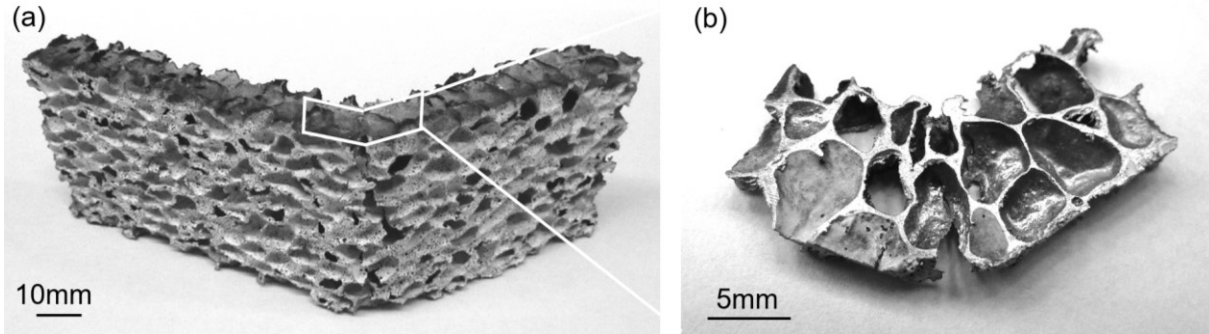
(a) Foam specimen at a bending angle of 45°, after being laser formed at 180 W and 10 mm/s, with a cross-section shown in (b). At large bending angles, the isolated cracks on the bottom surface grew larger and started to coalesce, shown in (a). In close proximity to the bending axis, cells at the top surface were crushed significantly, shown in (b), but the foam was still far away from complete densification.
